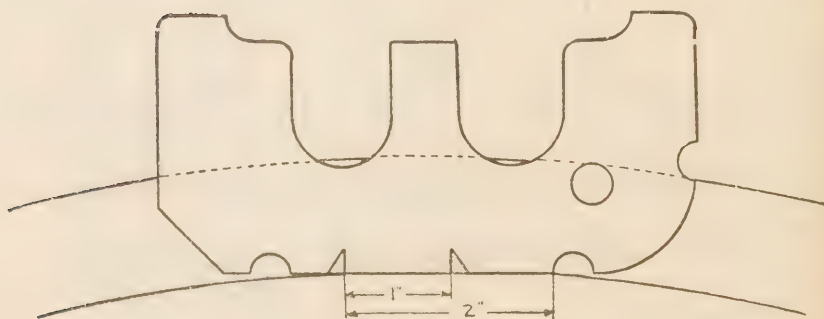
METHOD OF GAUGING SHELLLED AND FLAT SPOTS
